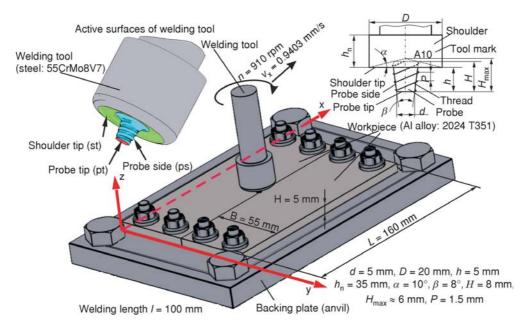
FSW tool with a conical shoulder and threaded probe [21]
